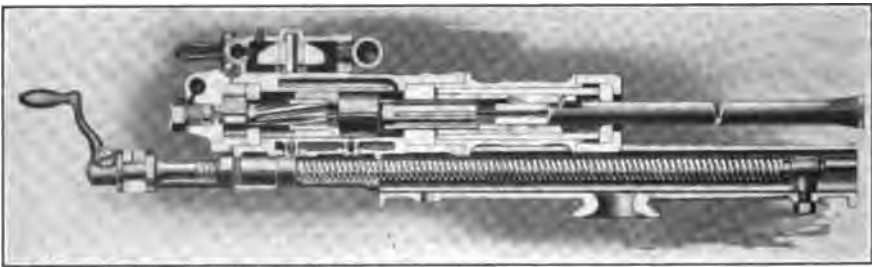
Leyner-Ingersoll hammer drill. Hollow steel and butterfly valve.
